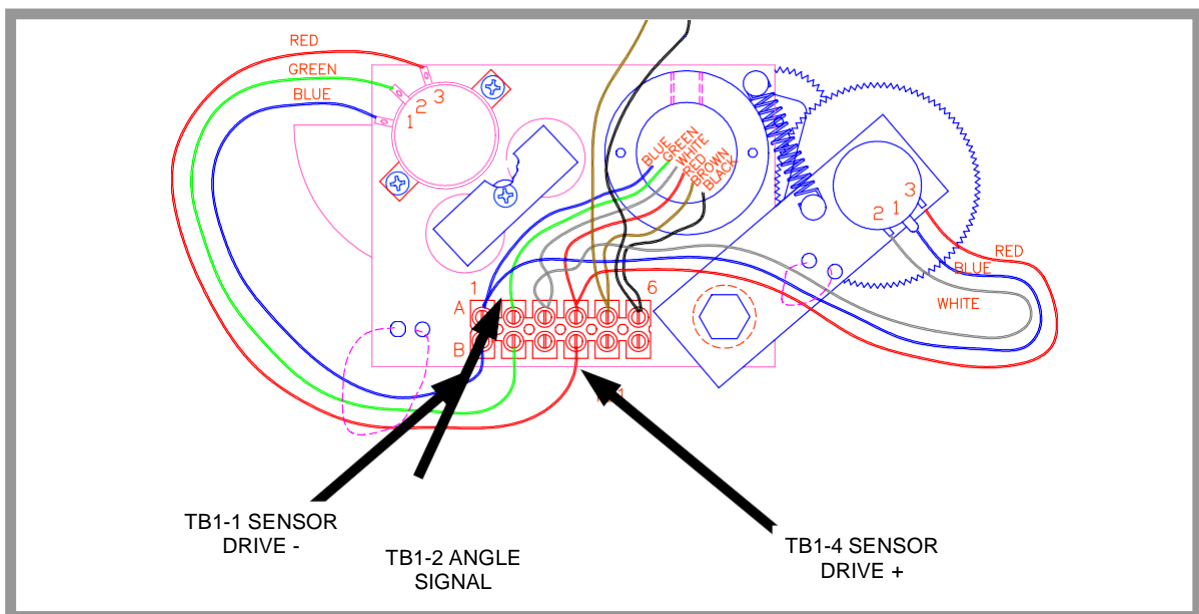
SENSOR BASEPLATE ASSEMBLY WIRING
